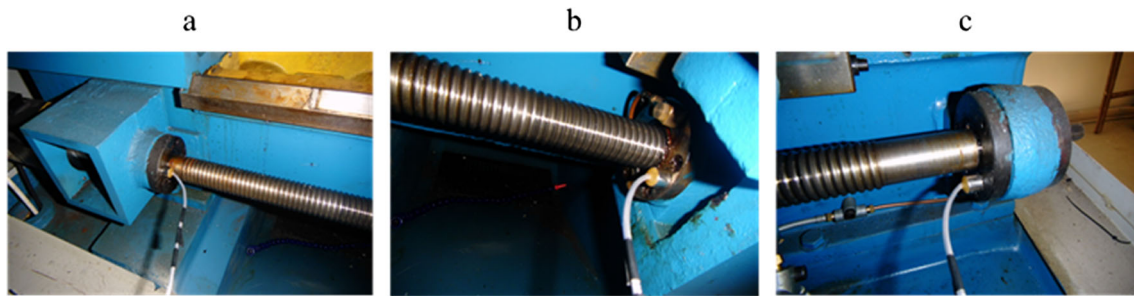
Arrangement of the temperature sensors: a front bearing, b nut, and c rear bearing
